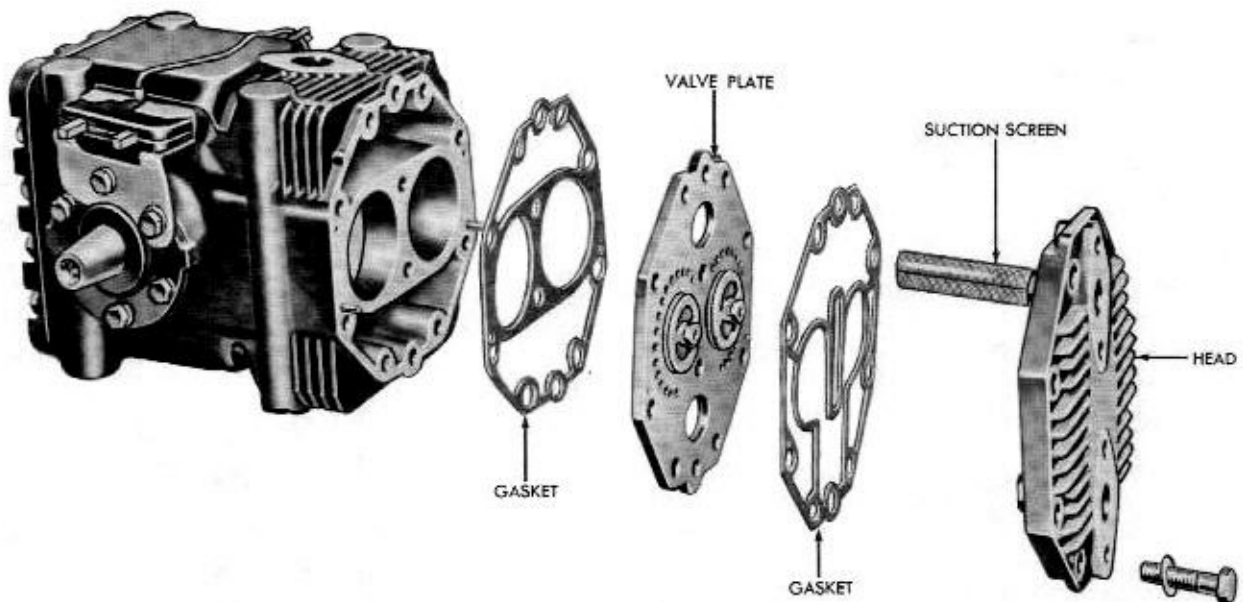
Compressor Cylinder Head and Valve Plate Disassembled—Typical—(61LM-8811)
